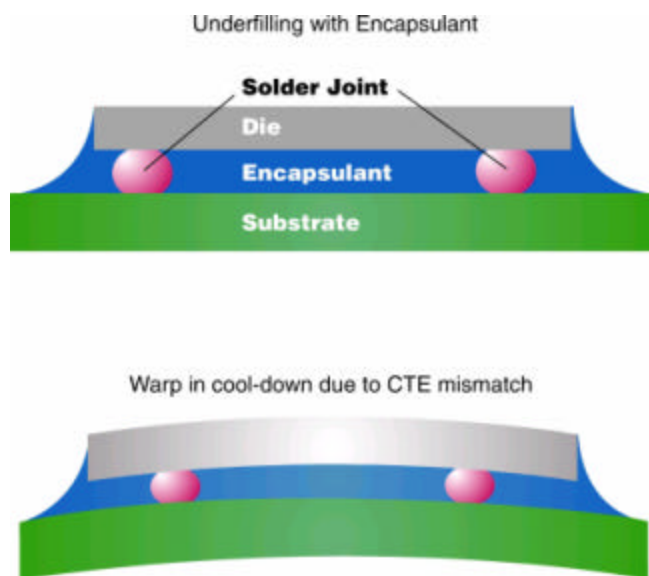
Encapsulated Flip Chip (Die) Assembly During Thermal Excursions
